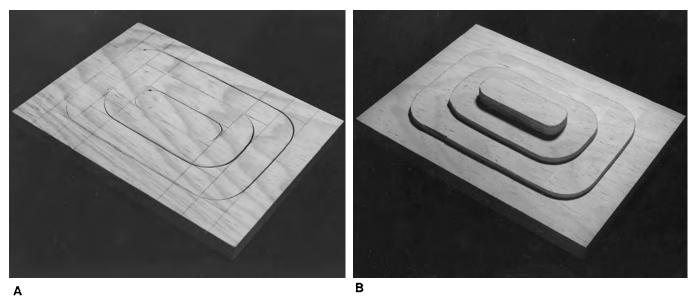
(A) Bevel cutting, done on one piece of stock, can produce deep projects. (B) Each piece fits into its neighbor.
